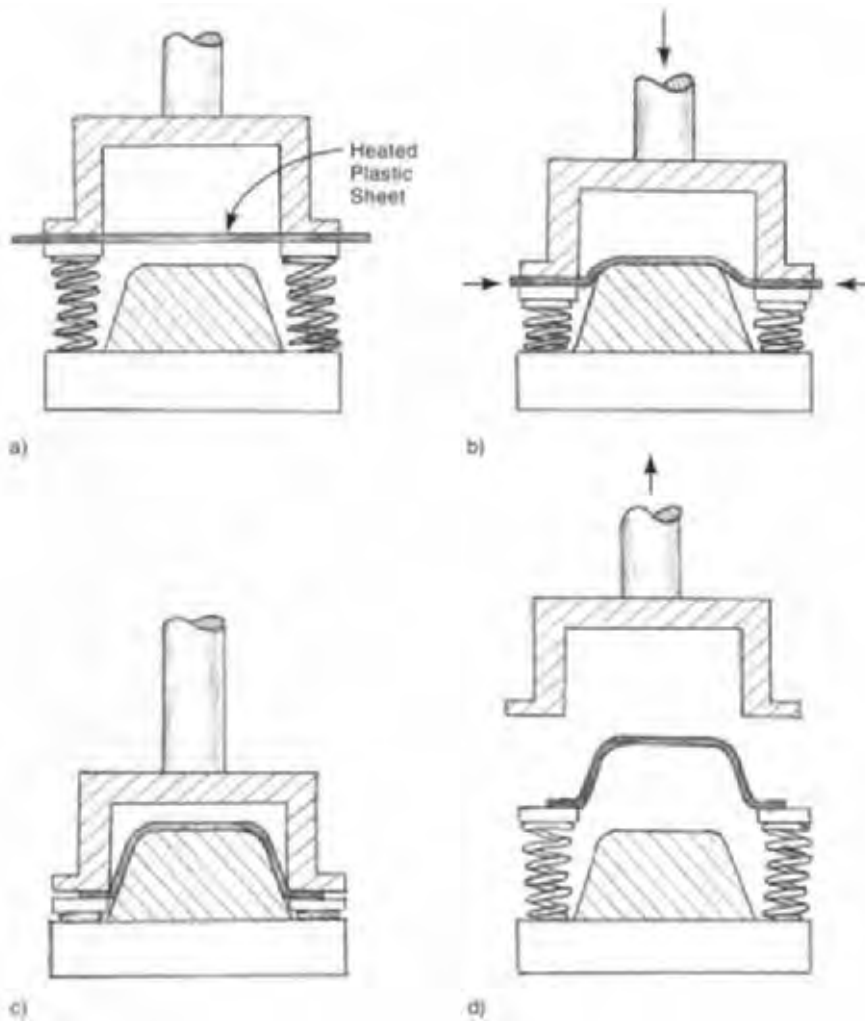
D6 Slip ring forming (slip forming): a) The heated sheet is held above the male mold. Holding force is only moderate. b) The sheet is pulled over the male die and partially slips through the spring-loaded holders. c) When the ram has completed its downstroke, the sheet is drawn over the male die. d) When the sheet has cooled, the ram retracts and the formed, drawn part is pushed upward and can be removed from the die.
